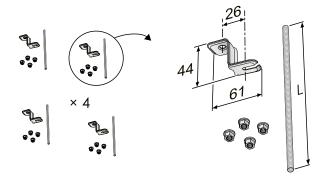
Assembly piece SYST MS M8-1, ceiling mount, and threaded rod
